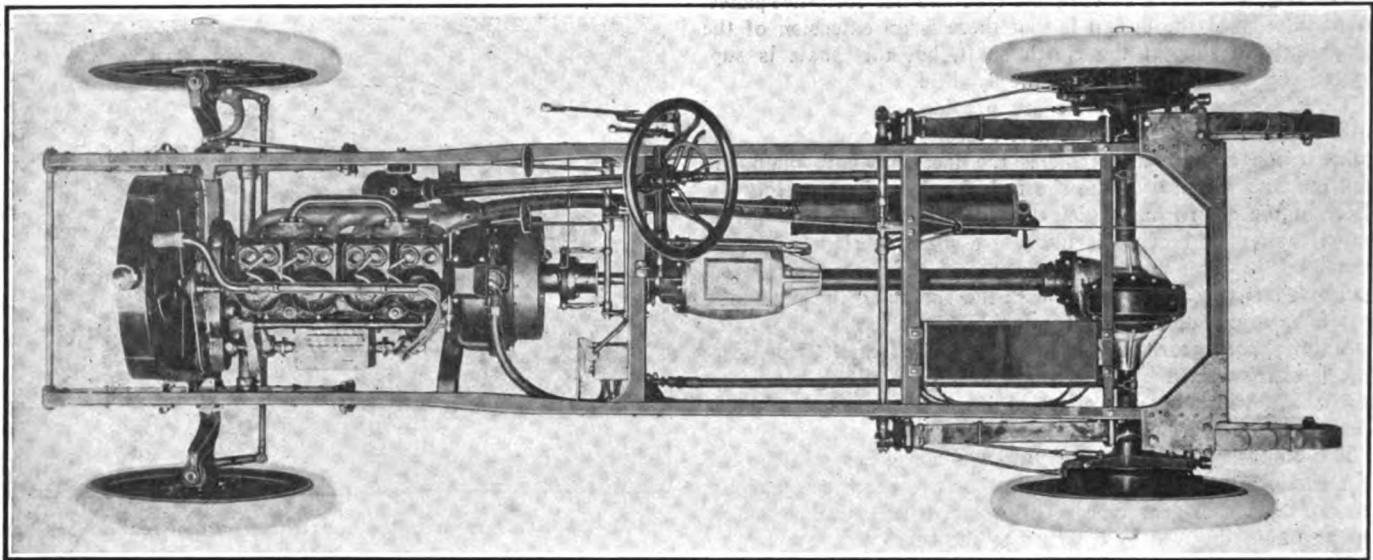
Rambler Cross Country chassis, showing arrangement of torque, drive and suspension members
